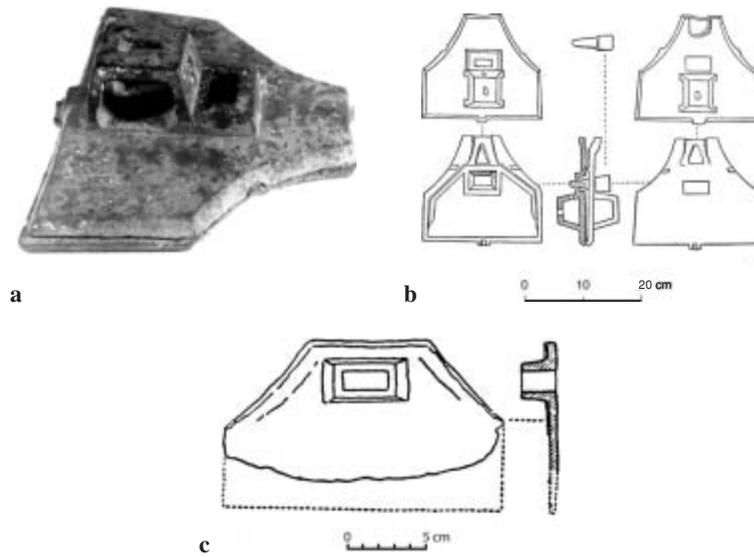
Three-section cast-iron mould for casting an iron hexagonal hoe-head, from the Warring States iron-foundry site in Xinglong County 興隆縣, Hebei. a. Photograph of the assembled mould. b. Sketch of the parts of the mould. c. Sketch of a hexagonal hoe-head from the same site. Sketches reproduced from Zheng Shaozong (1956, pp. 31, 35, figs. 2, 9); photograph supplied to Joseph Needham by the Chinese Ministry of Culture through Rewi Alley.
